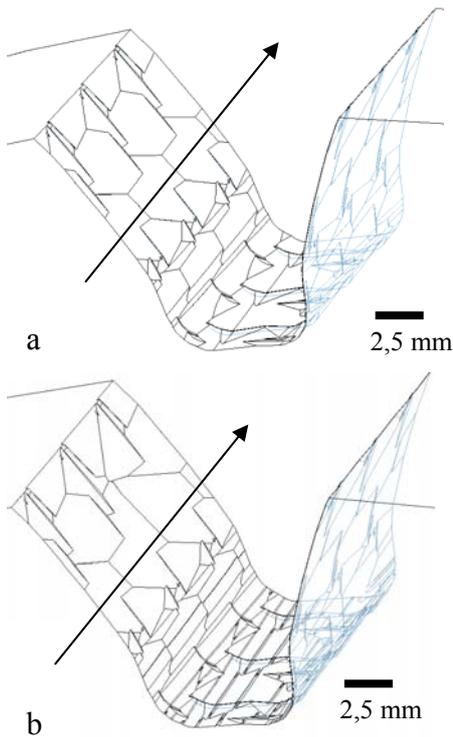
The generated surfaces using (a) a hob without surface damage and (b) a hob with surface damage. The hob translates in the direction indicated by the arrow.
